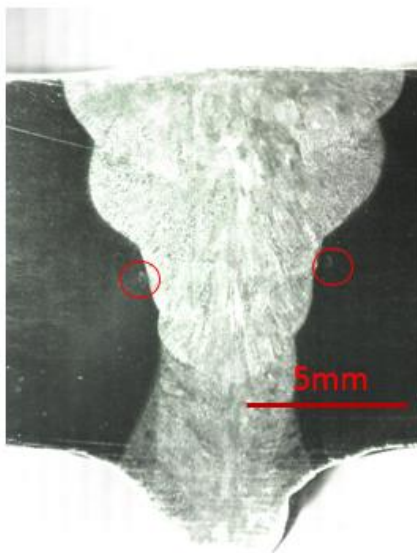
Cross section views of the finished weld joint on workpiece I
